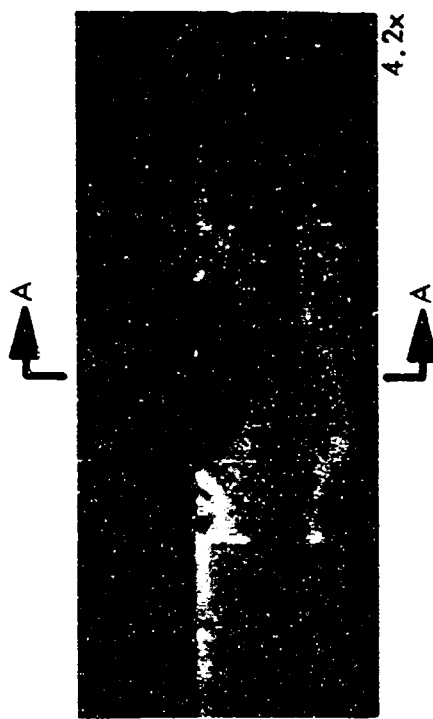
CRACK PATH AND FRACTURE APPEARANCE IN 2021-T81 ALUMINUM WELDMENT (Specimens B1-3 And B1-4)
